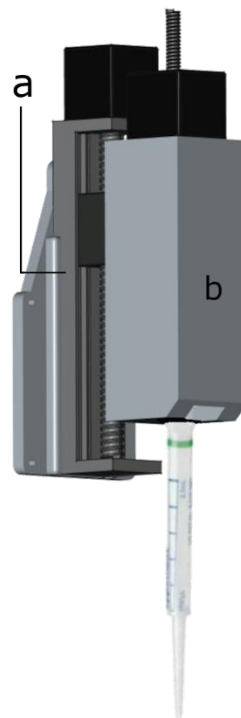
Syringe pump: (a) the Z-axis system consists of a PLA-printed base mounted on the XY-axis carriage, supporting a NEMA 11 stepper motor connected to a threaded rod that drives the lead screw assembly. (b) For liquid aspiration and dispensing, a NEMA 14 stepper motor-with a similar drive mechanism-controls the syringe plunger.
